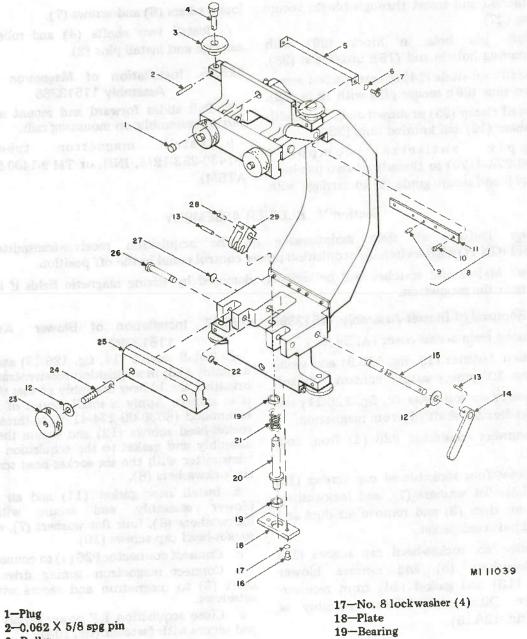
Magnetron tuning drive and mounting bracket—partially exploded view.
